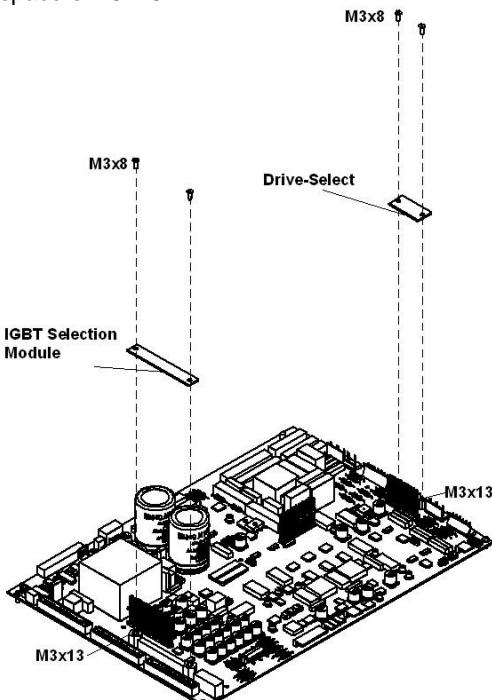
Disassembly of the Drive-select and IGBT selection module
